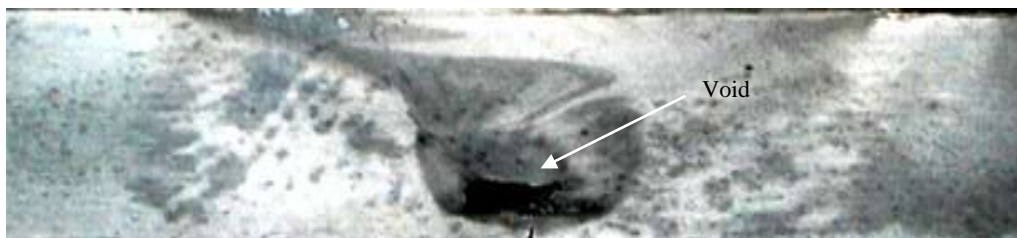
Macrostructure of weld generated at  $1.5^{\circ}$  tool tilt angle, 700 mm/min, 1080 rpm
